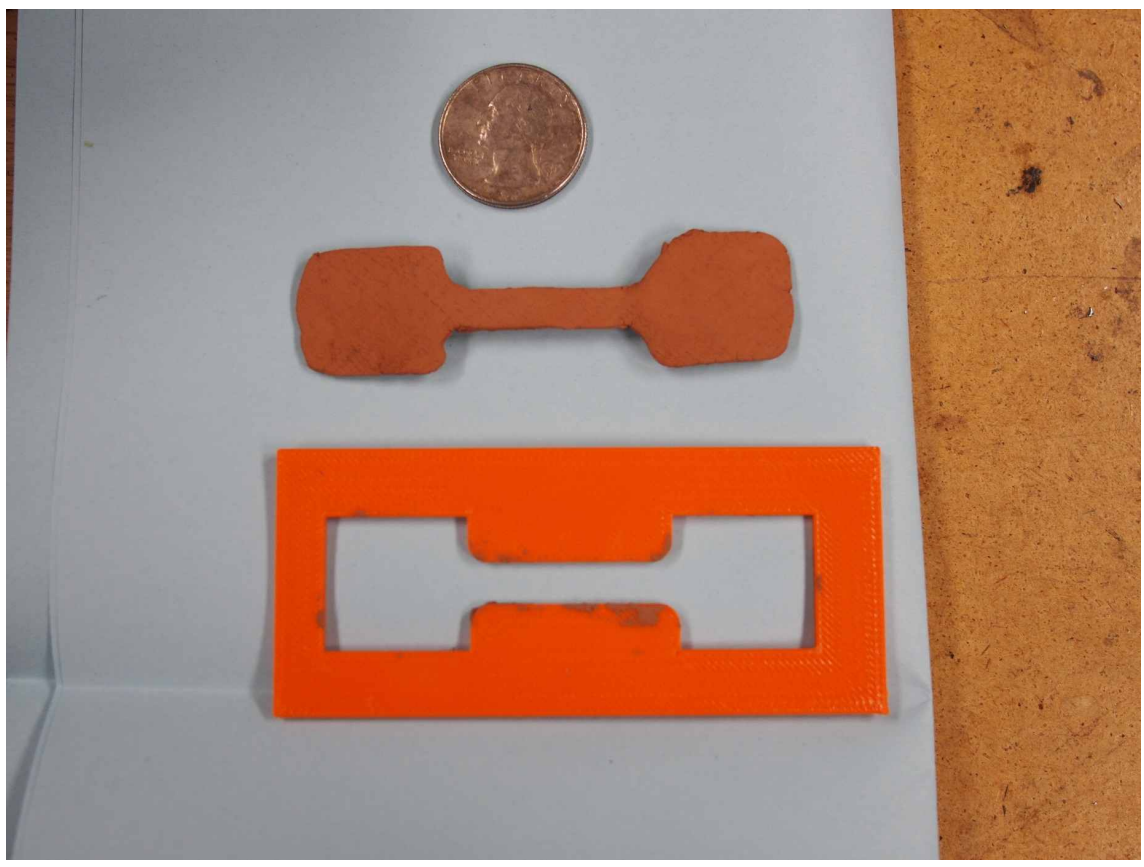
3D Printed Mold and Clay tensile bar.
